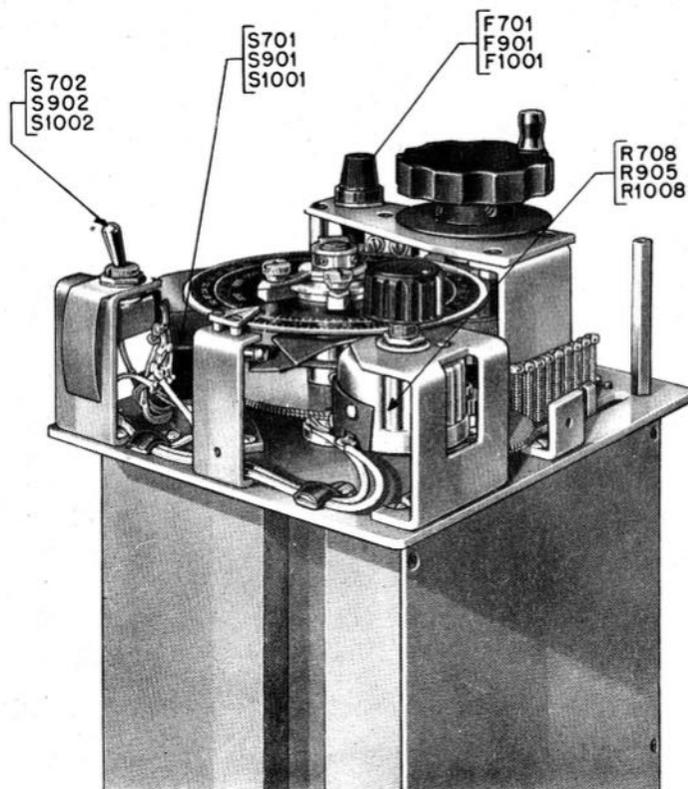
Sector Sweep Tuner, Parts Location, Bottom Right Oblique.
